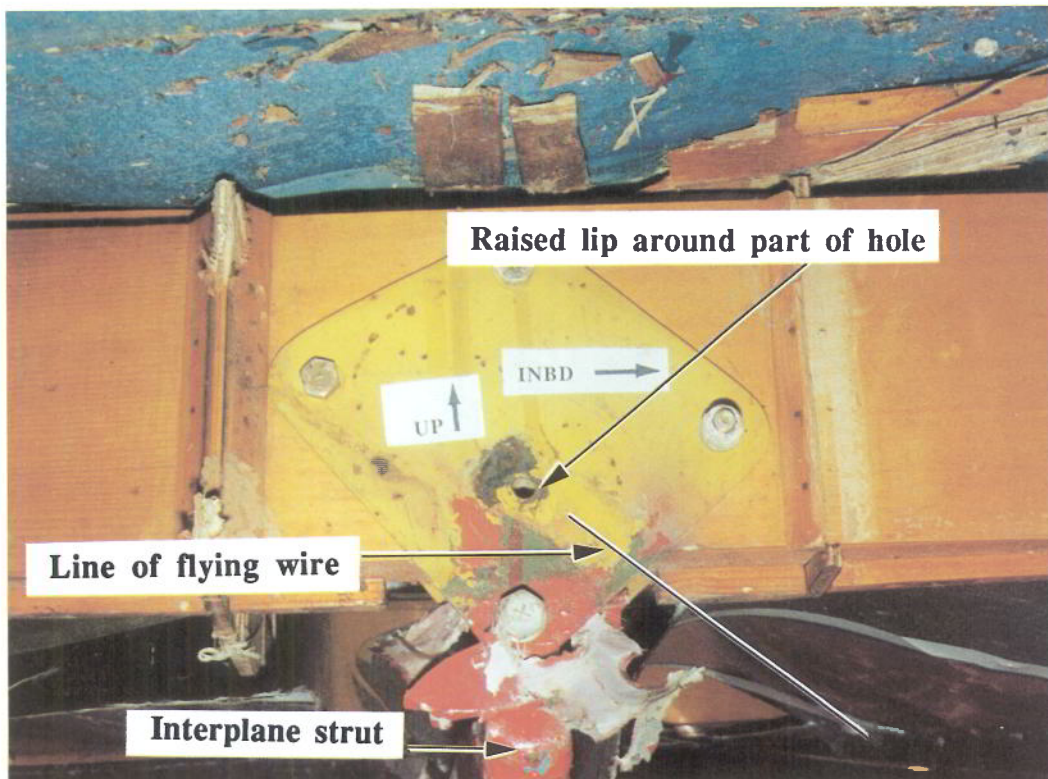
View on forward face of front spar of RH upper mainplane. Note area of paint removal due to fretting from channel bracket
